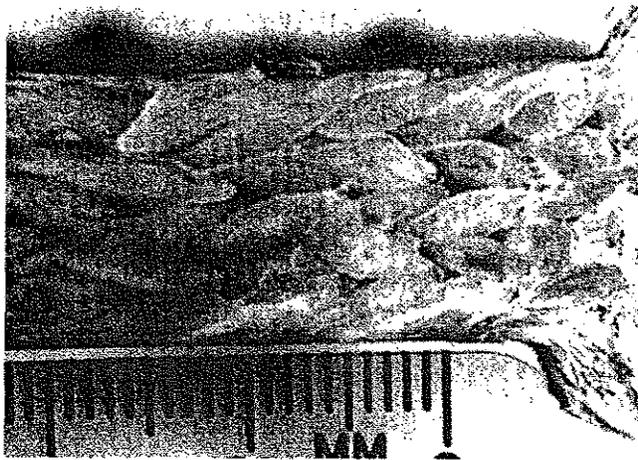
Side view of fracture surface of high velocity impact.
